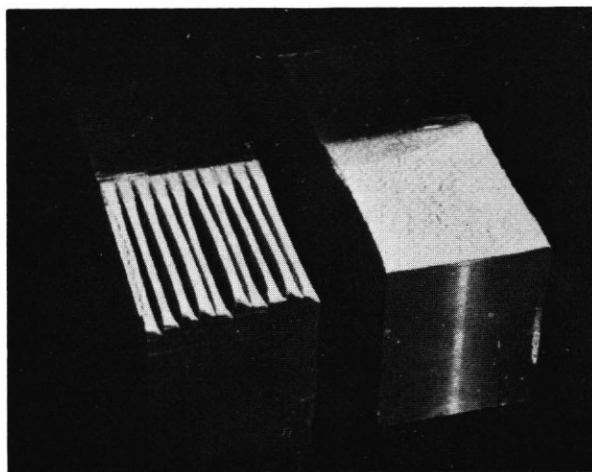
Residual statical failures after fatigue cracking in solid and laminated metal (2024-T3). The right-hand specimen shows a brittle failure after the initial fatigue crack has penetrated from the top side. The laminated metal specimen the same alloy shows residual failure of a ductile nature in the individual bonded metal sheets.
